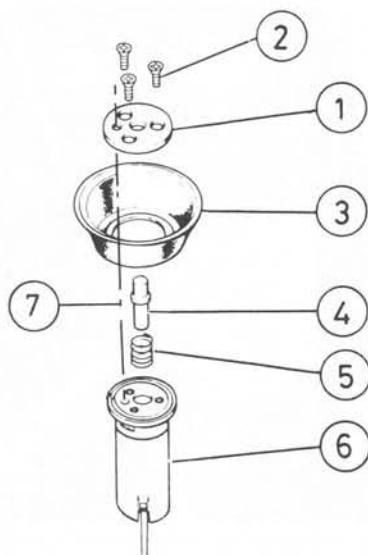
Diaphragm/throttle valve assembly – CD125 T
